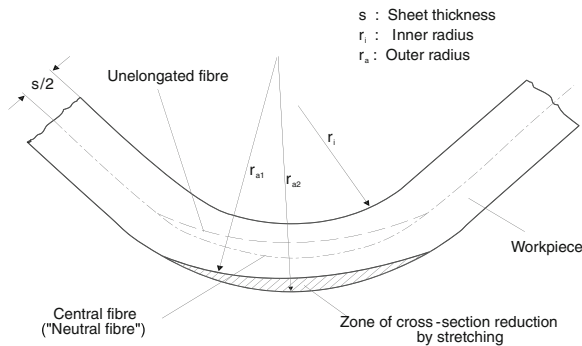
Bending zones in workpieces with a bending angle of 90°
